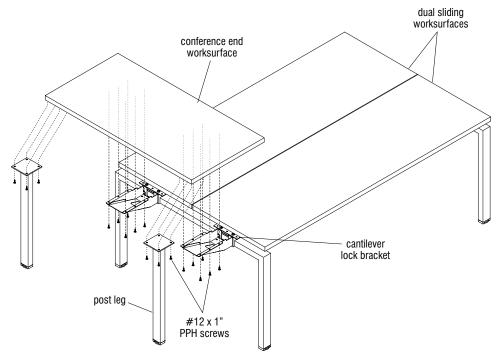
Conference End with Dual-Sided Worksurfaces (sliding shown)
